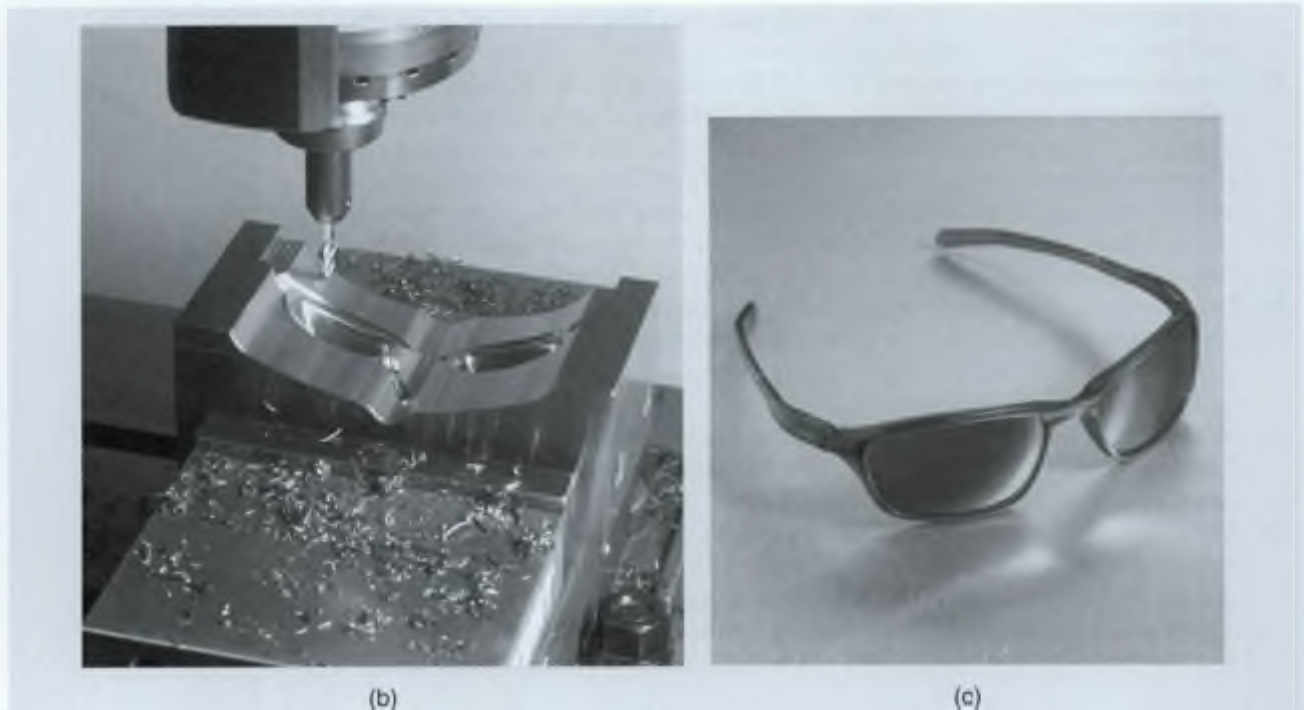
(continued) (b) Machining of the die cavity, using a computer numerical-control milling machine. (c) Final product produced from the mold. Source: Courtesy of Mastercam/CNC Software, Inc.
